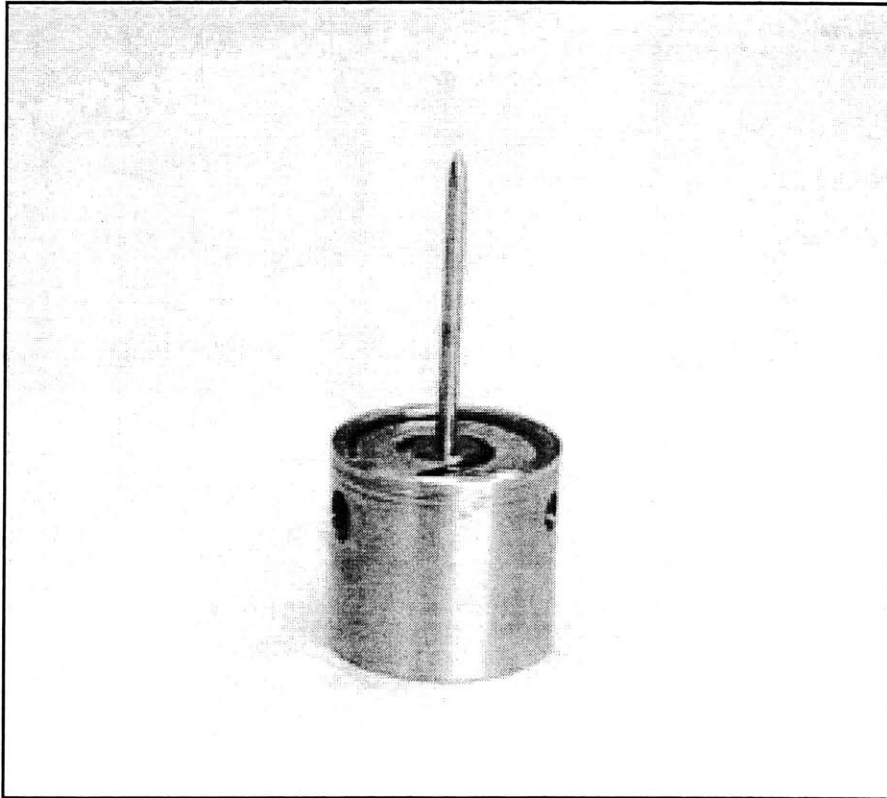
Photograph of Lower Multi-leaf Flexure Assembly
